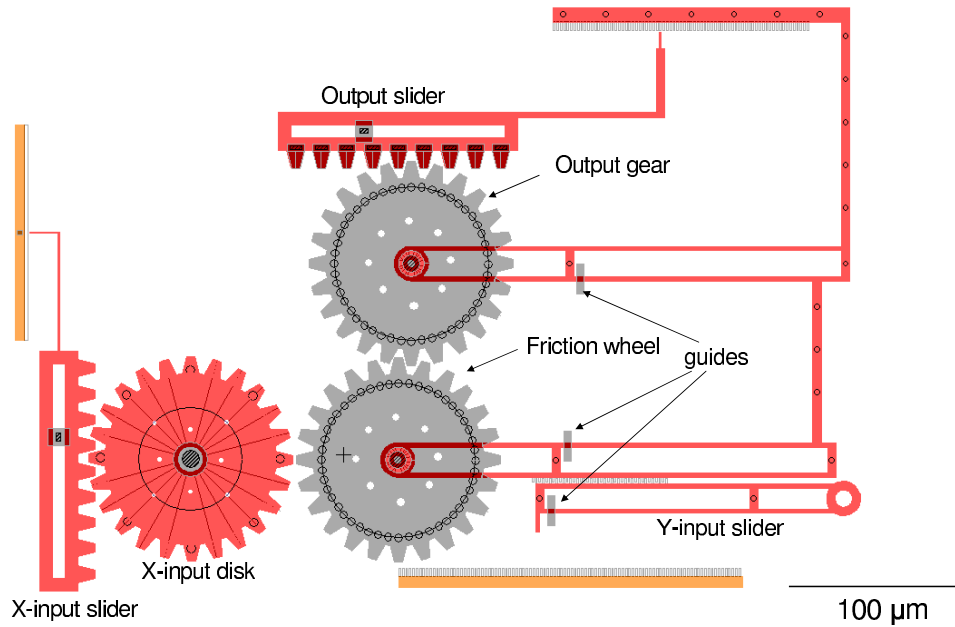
Computer aided drawing of the integrator in its as-fabricated position with the friction wheel and X-input gear separated from one another.
